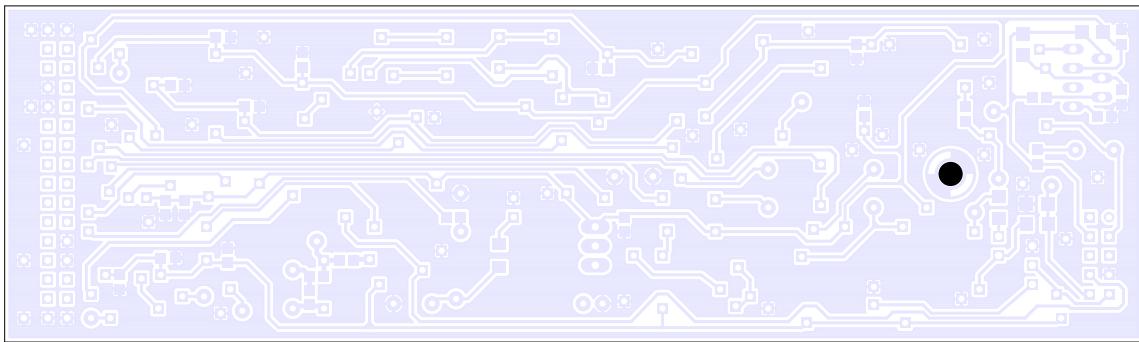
Board bottom view showing connectors, test points, vias and wired components
